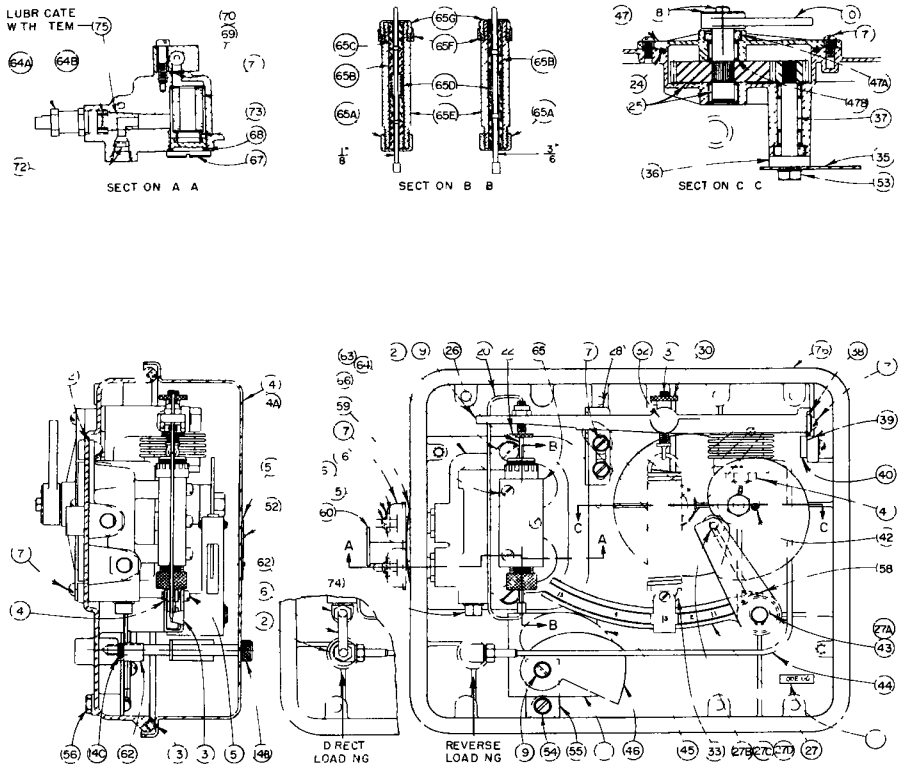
Parts Drawing P92 11, Positioner Part No 5311450 □
